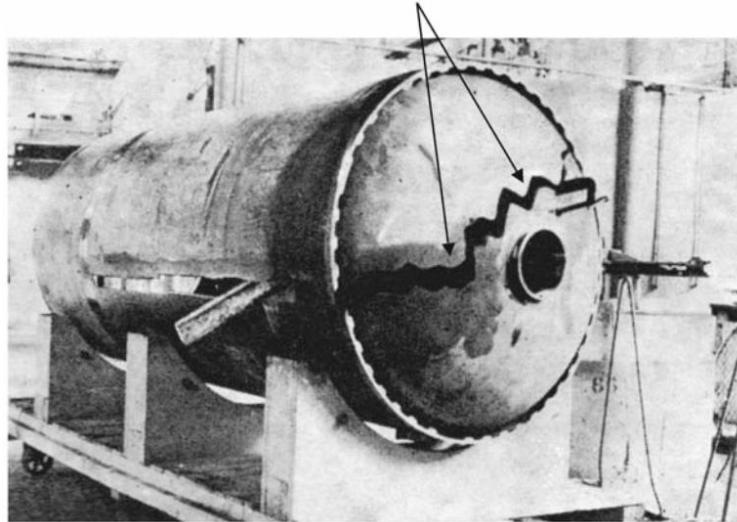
In-service failure of a rocket due to stress corrosion cracking (SCC) [96].
